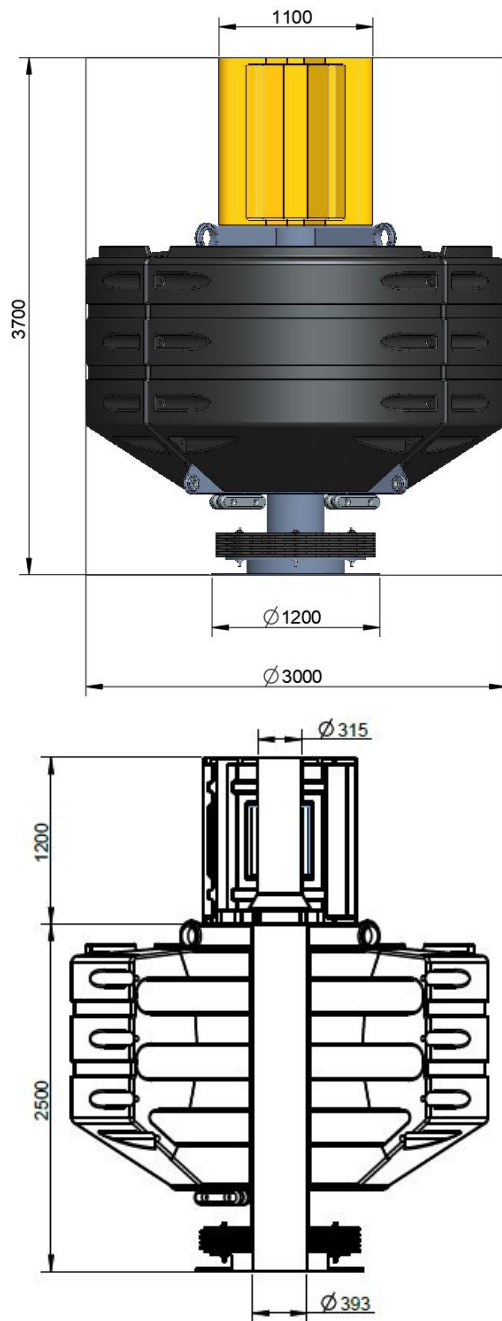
JFC Seagull SG3000 buoy - (Courtesy of JFC Marine).
